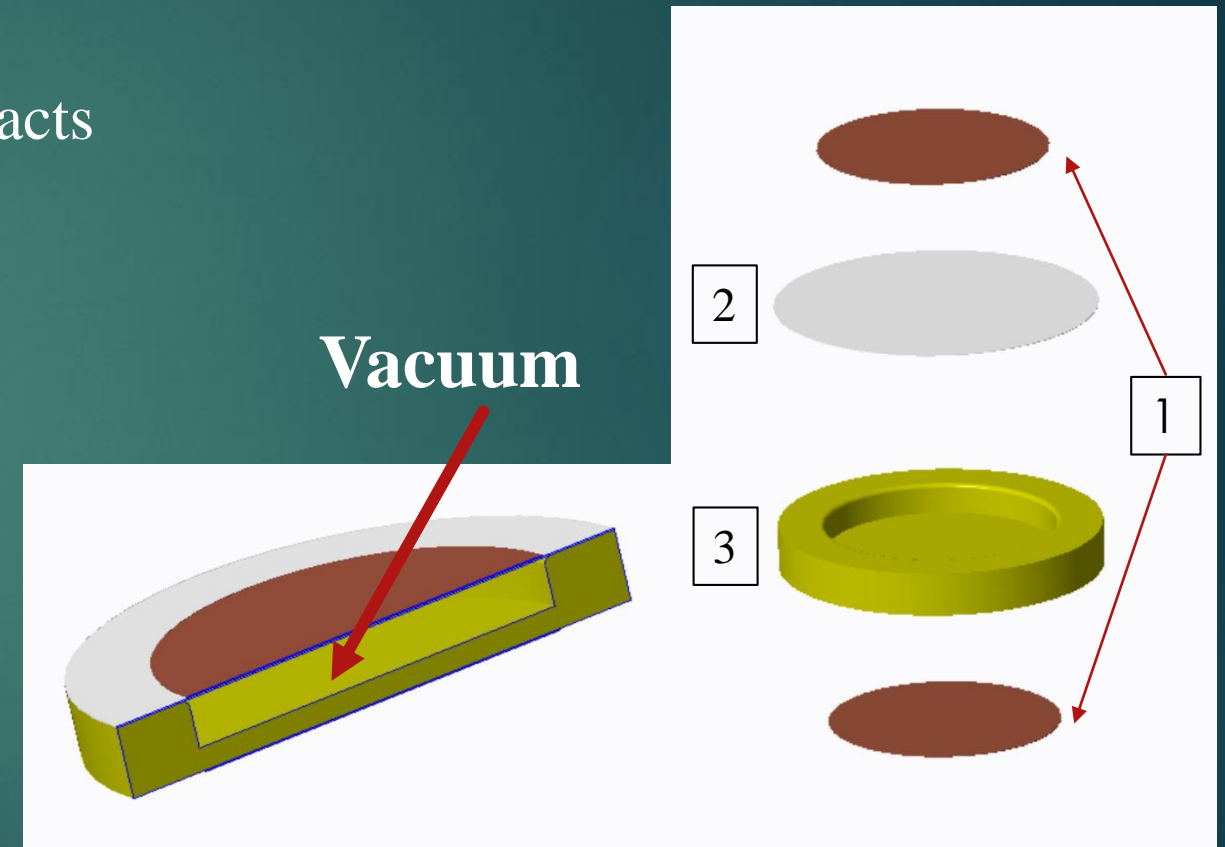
Cross section view of capacitor (left), and exploded view (right)
